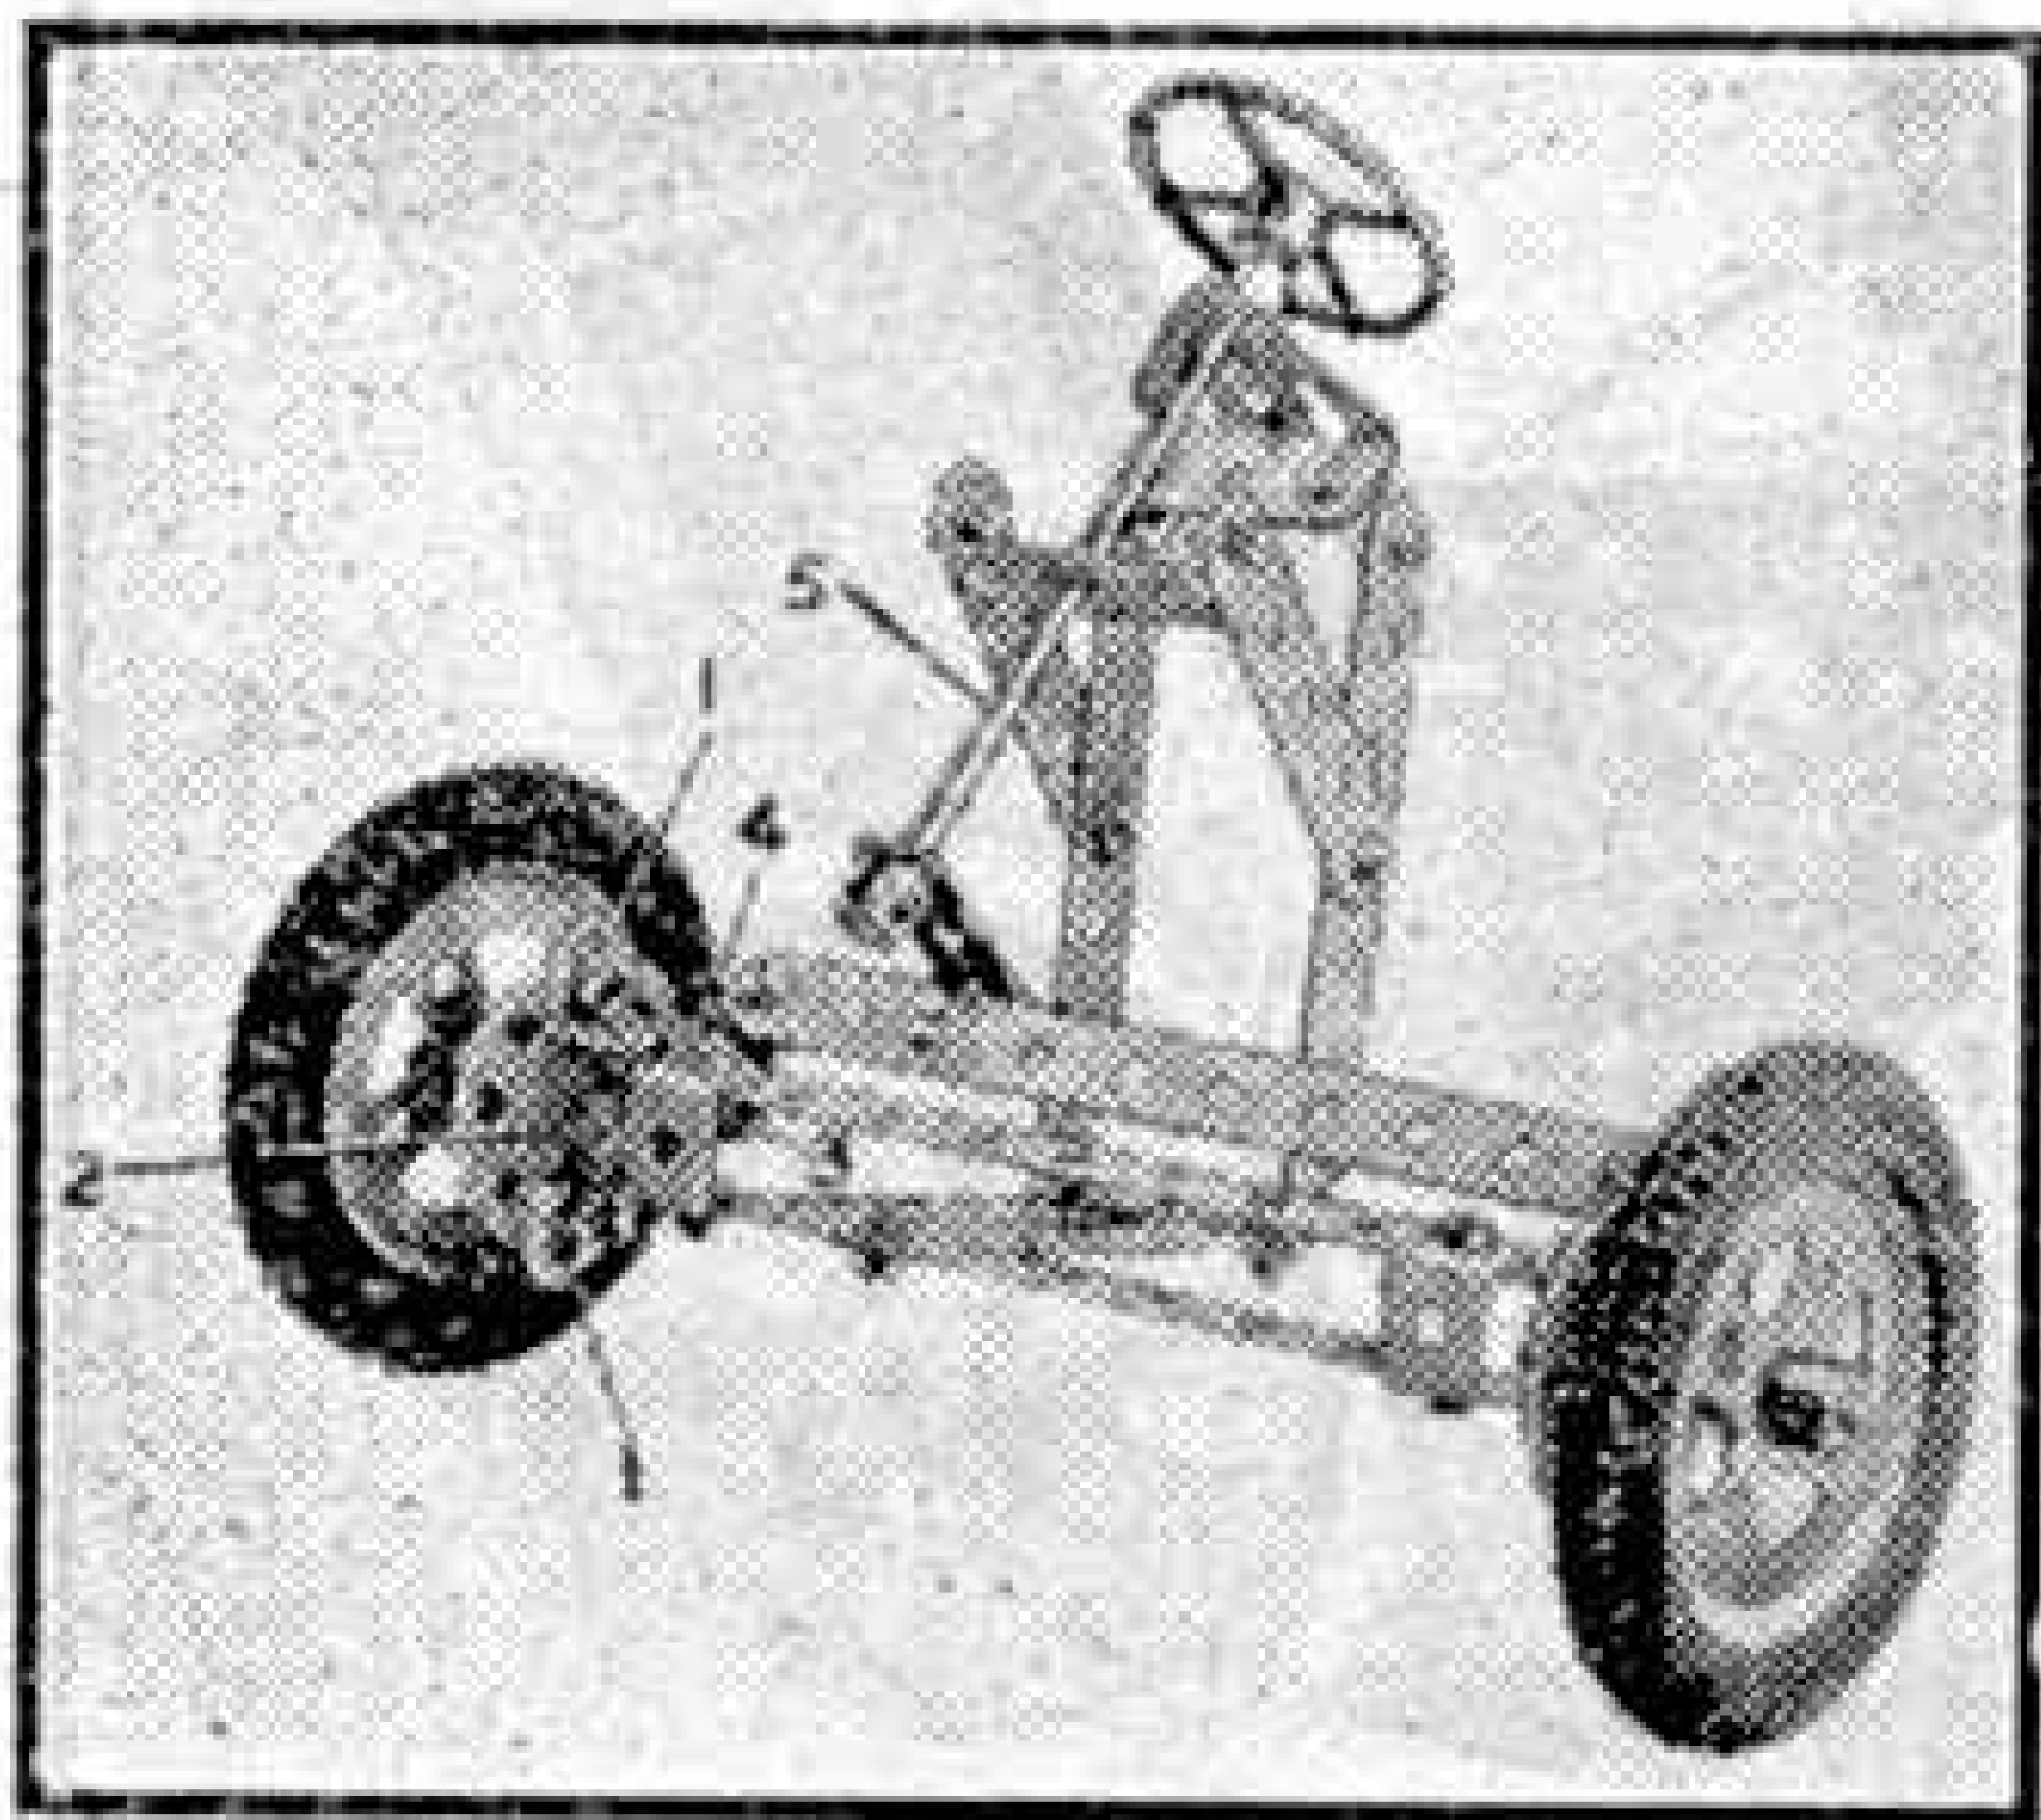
A simple steering gear designed by P. E. Webb, Camberley.
